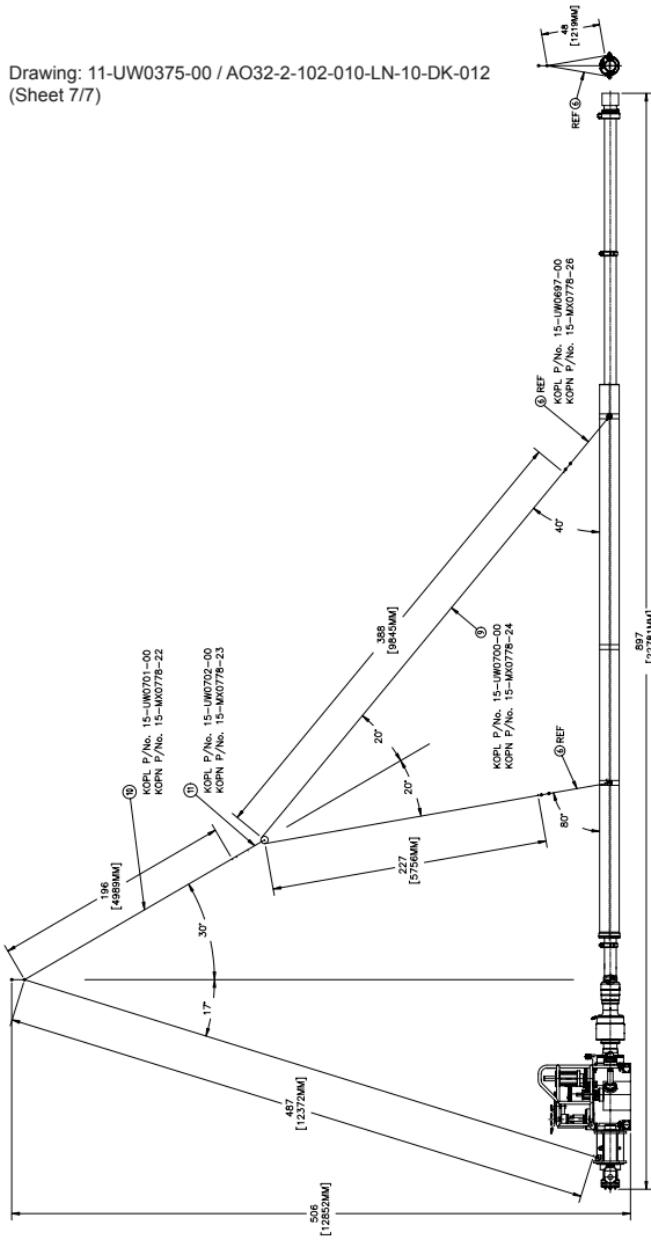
UW0375-00 / AO32-2-102-010-LN-10-DK-012
